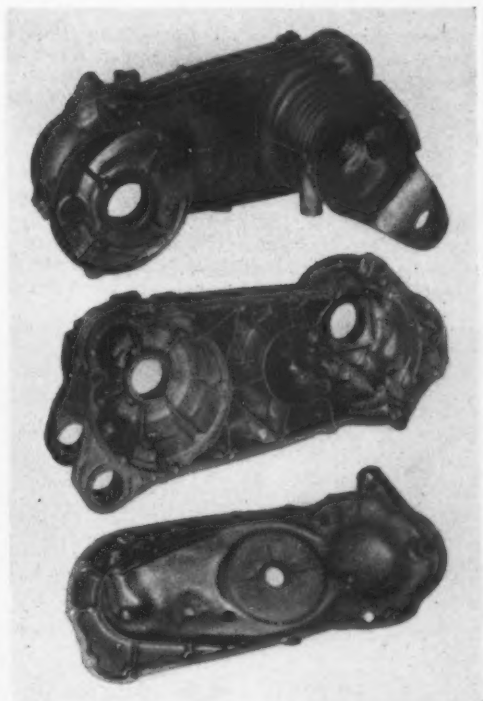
(Top) Two Views of the Combined Crank- and Transmission Case Casting Employed for the Motor Scooter Shown in Fig. 3, and (below) the Cover Casting for the Unit
